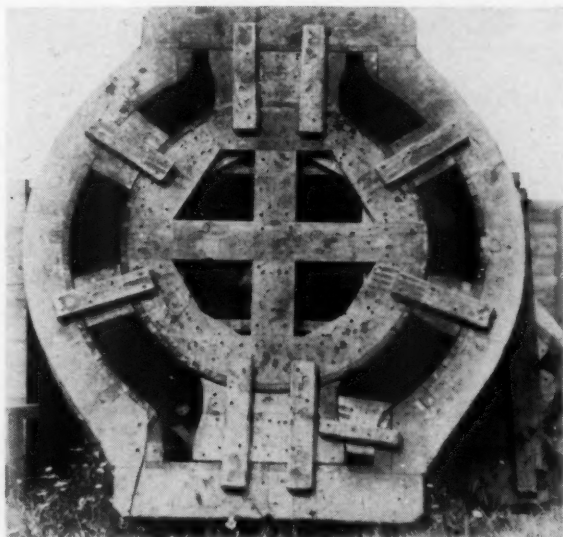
SEGMENT CORE BOX FOR JACKET CORE FOR GAS ENGINE CYLINDER.
